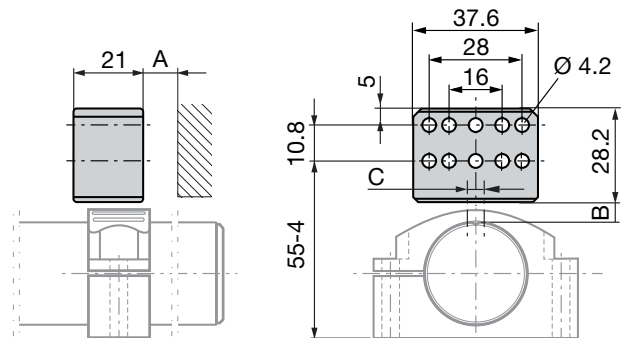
Dimensions and spacing with magnet BTL6-A-3800-2
